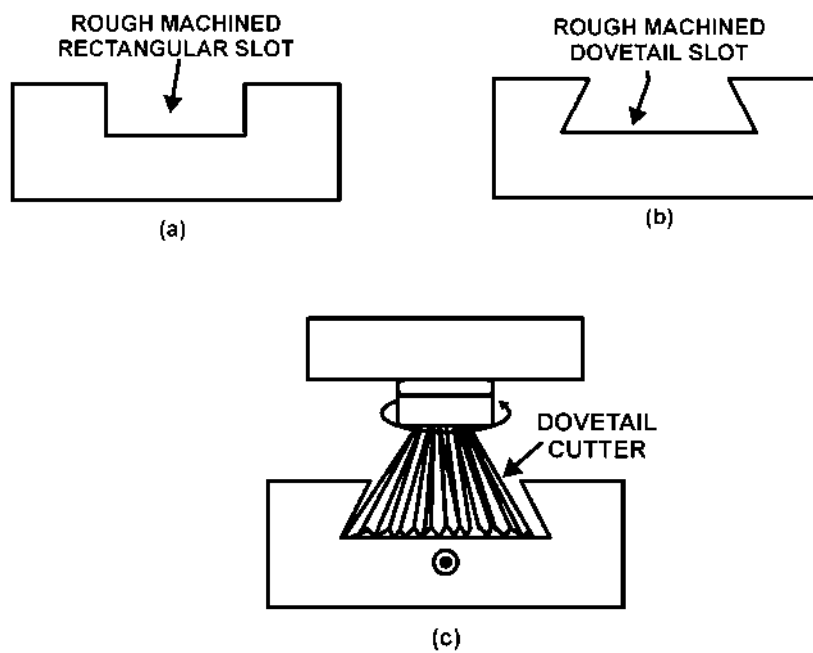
, Milling a Dovetail slot. (a) Rough machined rectangular slot, (b) Rough machined dovetail slot
